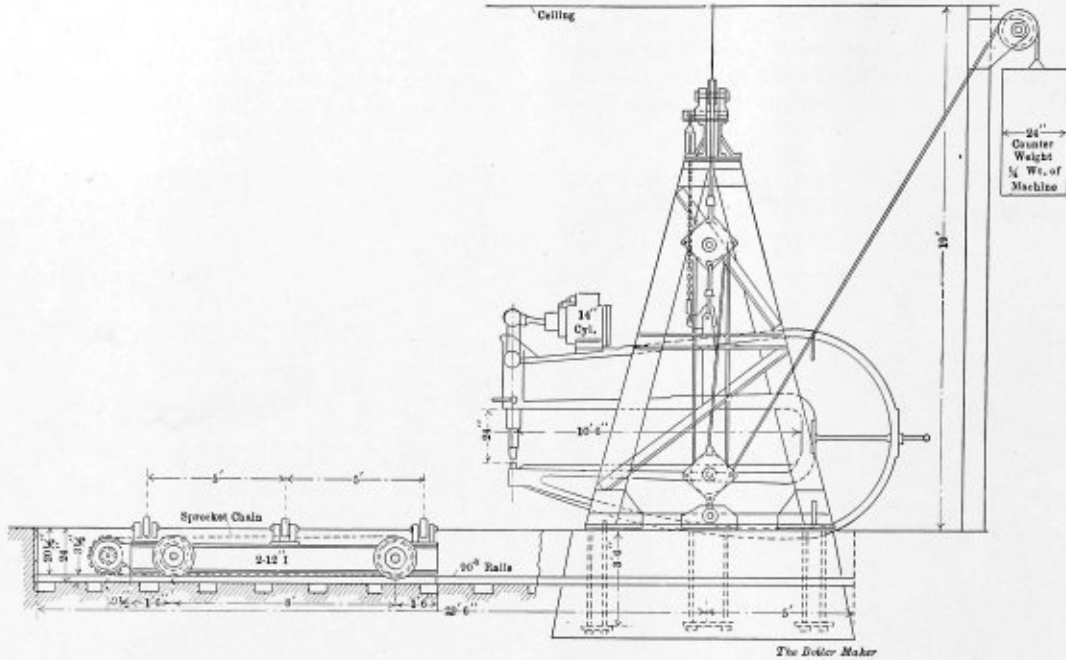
SIDE VIEW OF SUSPENDED RIVETER.
